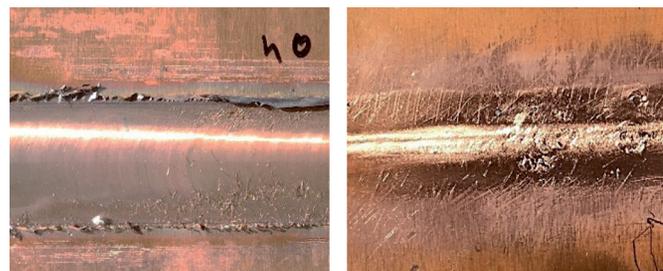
Surface/root appearance - welded joint FSW-IG copper Cu99.
